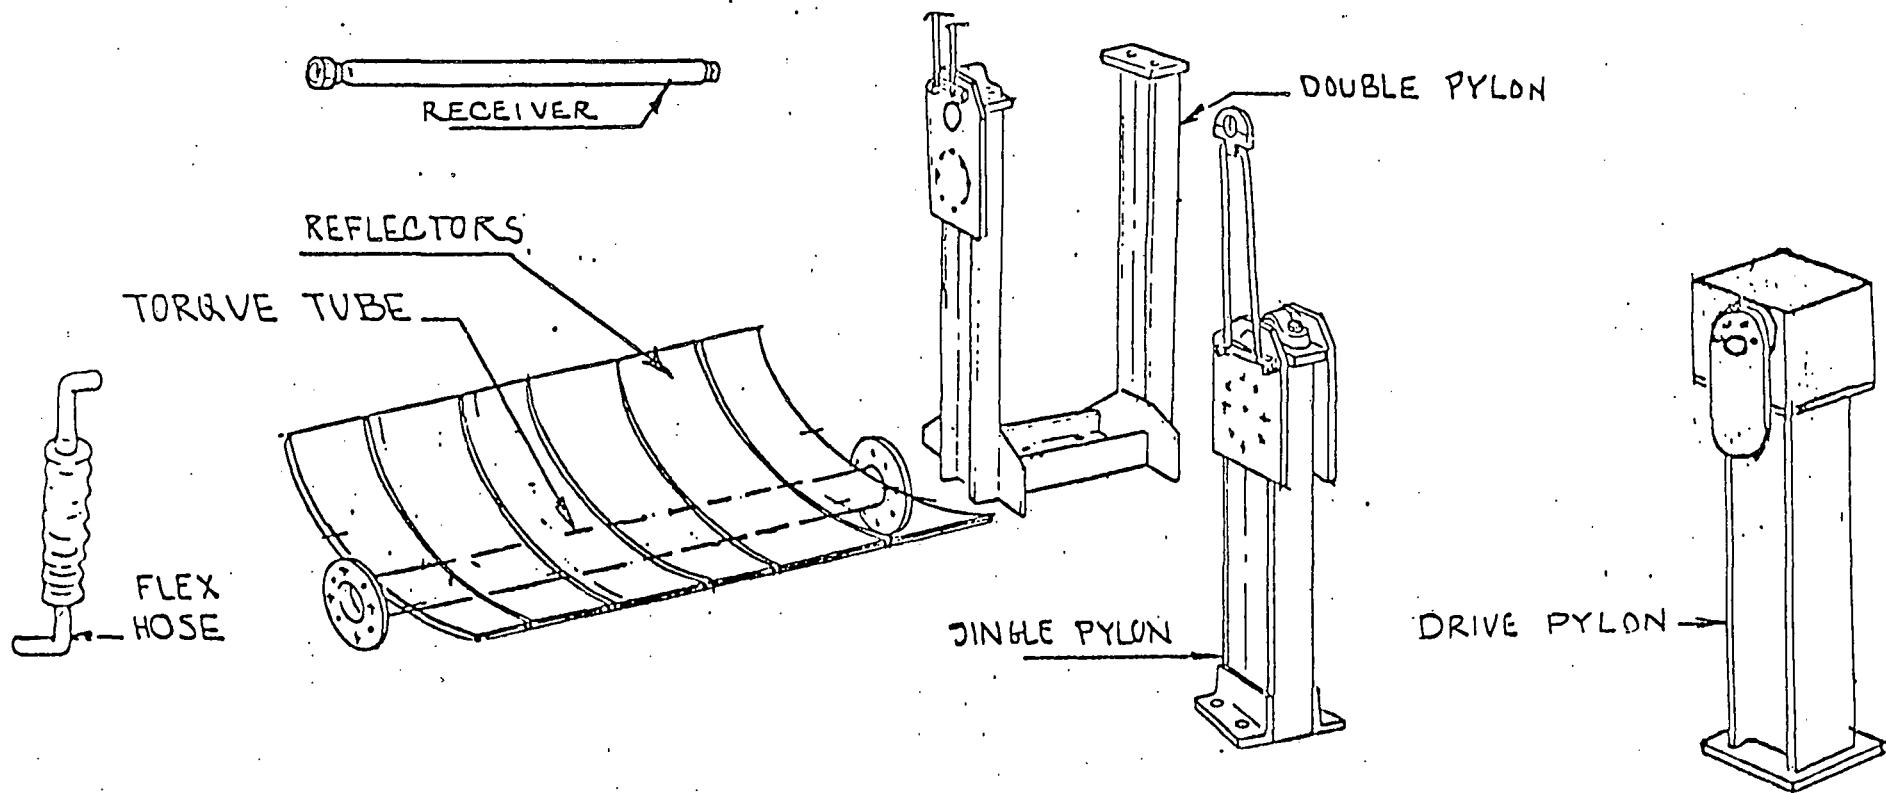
80 FT. COLLECTOR MODULE ASSEMBLY.
